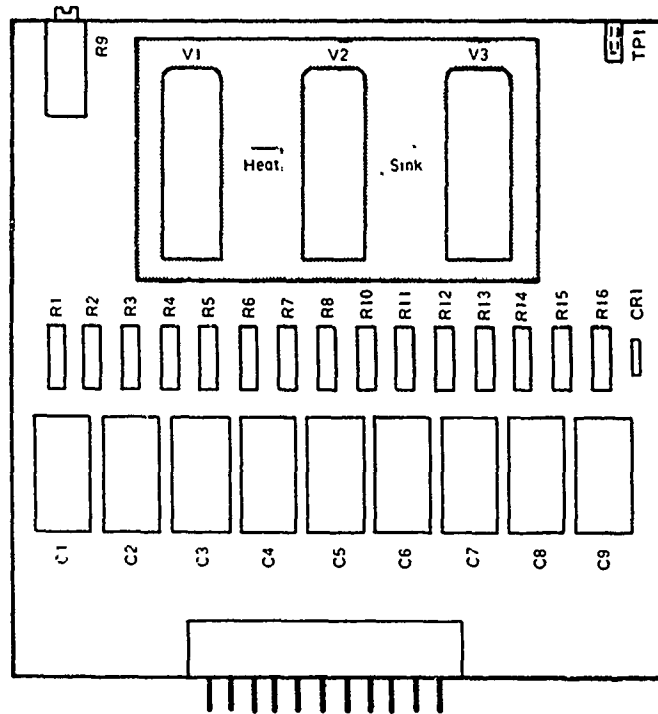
Layout of a typical video amplifier chain on single-sided printed board. (24)
